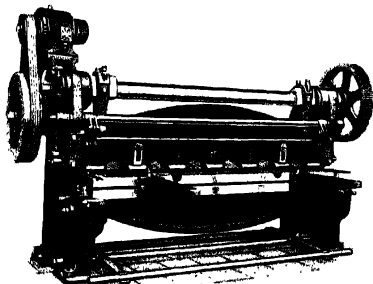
Rhodes high-speed guillotine shearing machine
